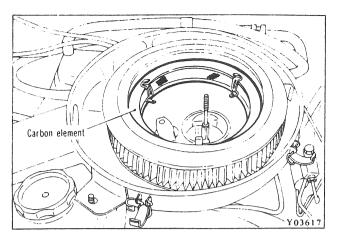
Replacing a carbon element. (Courtesy of Chrysler Motors Corp.)
